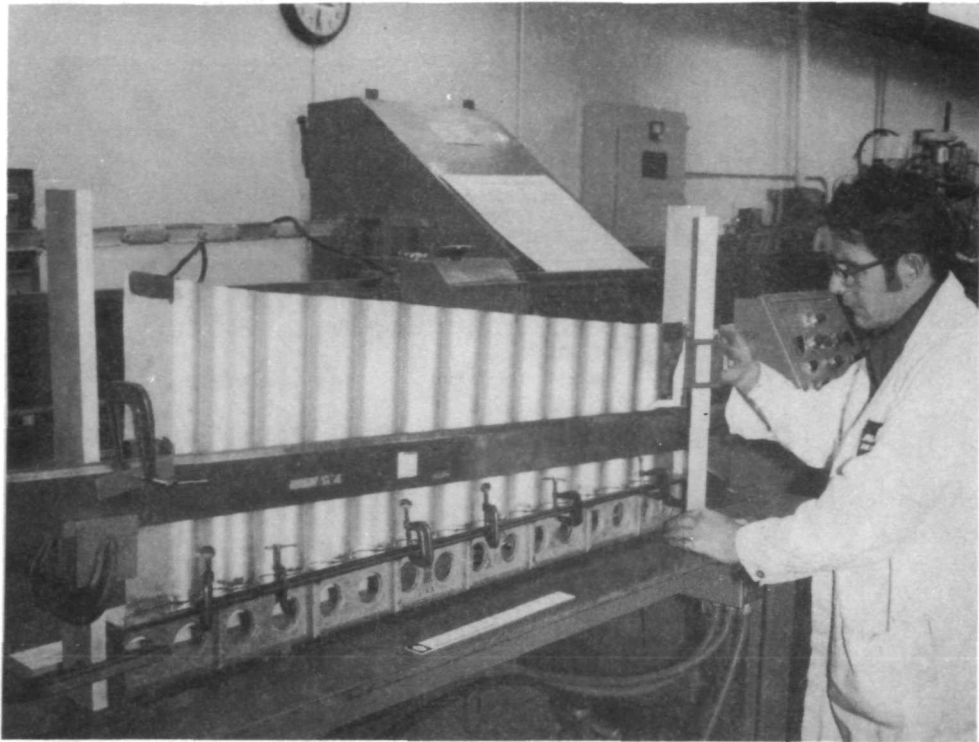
Locating the Trimline of the Web for the Opposite Cap in the Sinewave Weld Assembly
